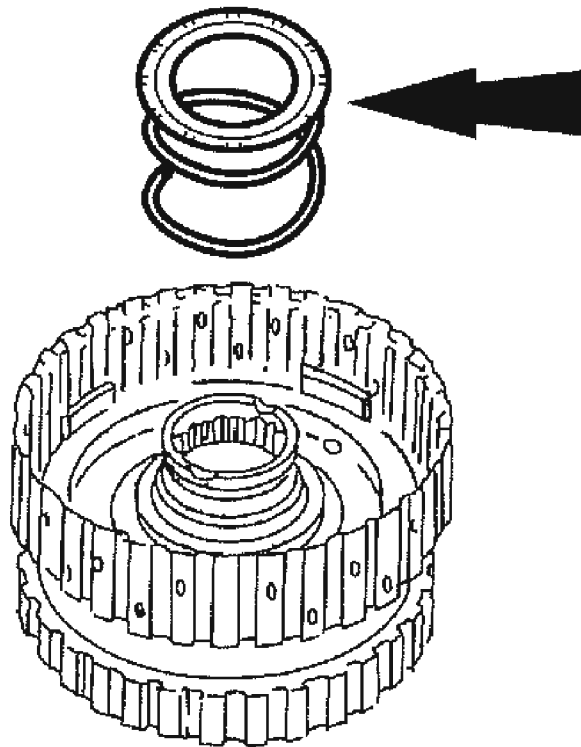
Installing Coast Clutch Piston Assembly Onto Special Tool
